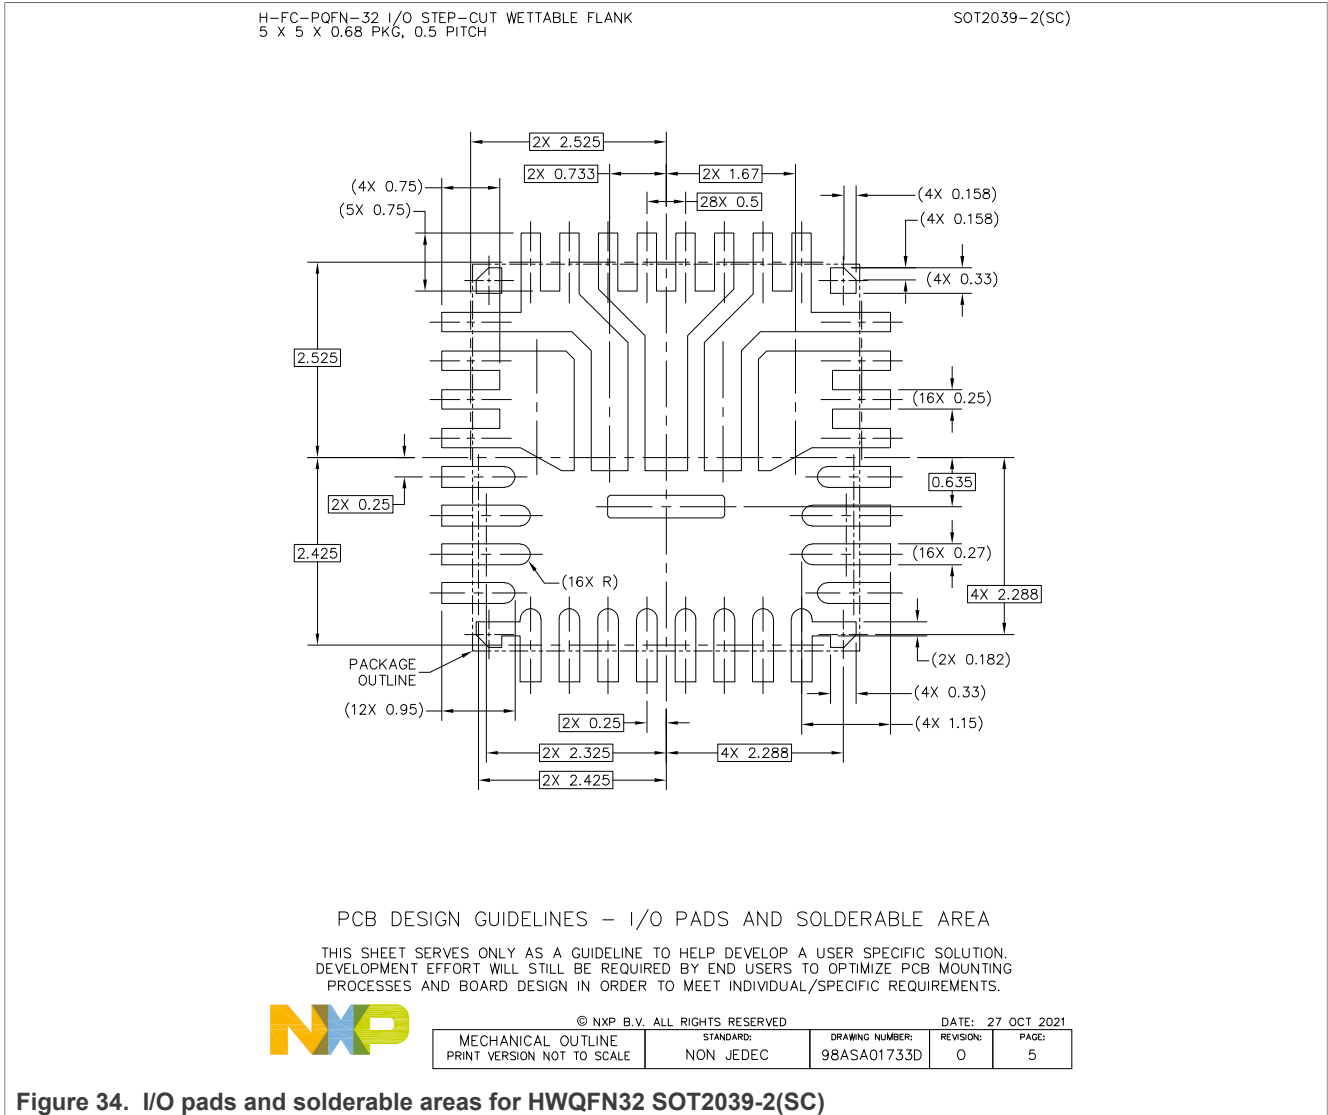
I/O pads and solderable areas for HWQFN32 SOT2039-2(SC)
